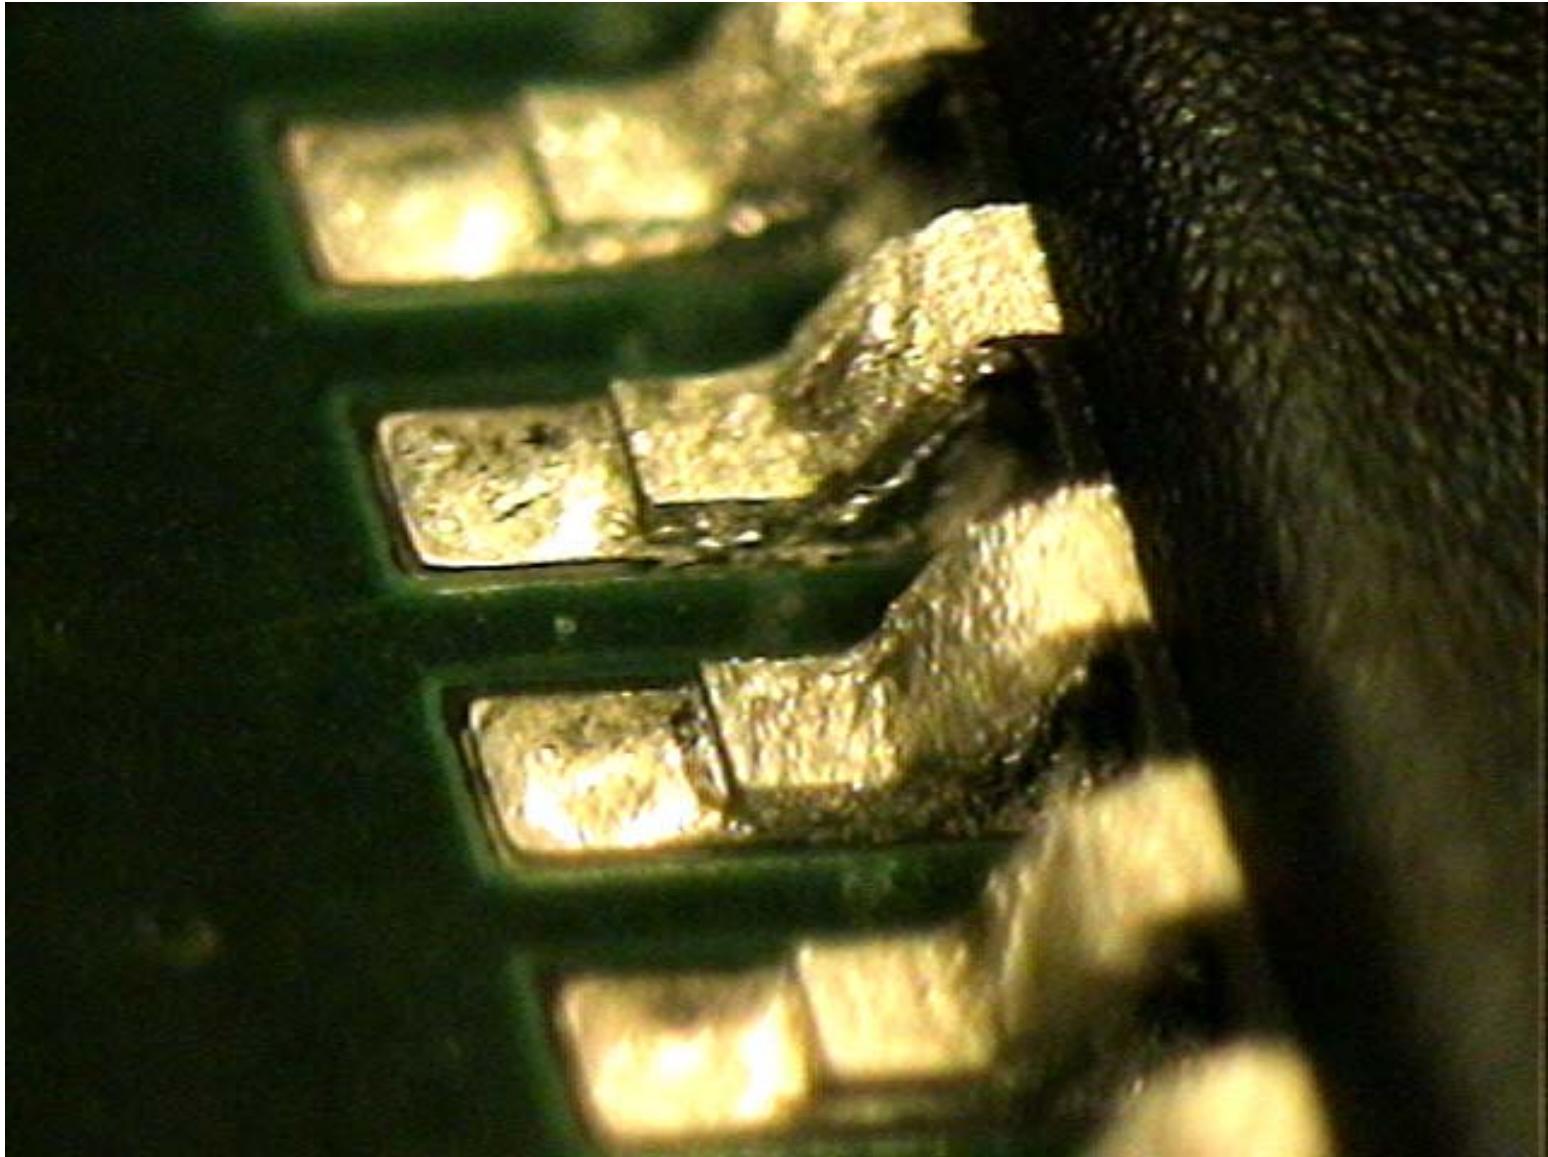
Vehicle ID 119, TSOP U29, SACB Solder/SnCu Component Finish, 100x
